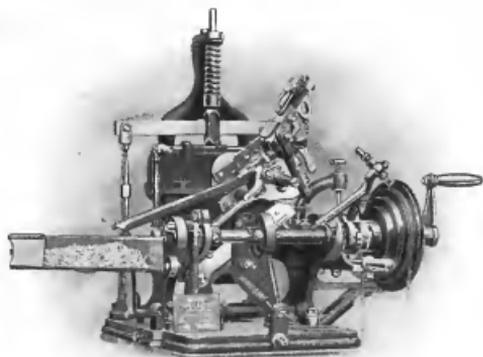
Davis pivotal typecaster ; throwing out finished type.
